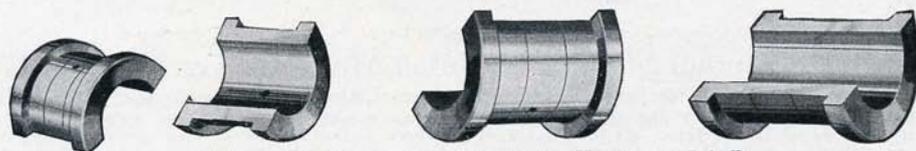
Phosphor Bronze Bearings for Headstock Spindle
